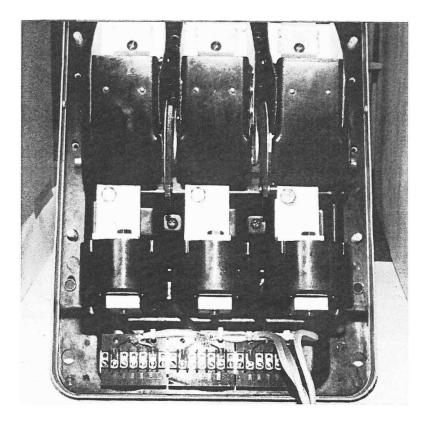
AKU-25 Back Frame with MicroVersaTrip® PM Conversion Components Installed
